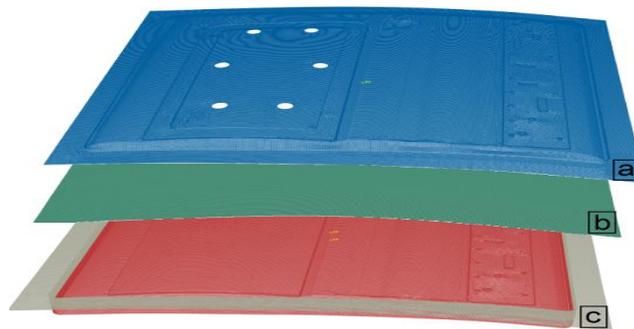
(a) Upper die, (b) sheet metal, (c) lower die and blank holder surfaces
